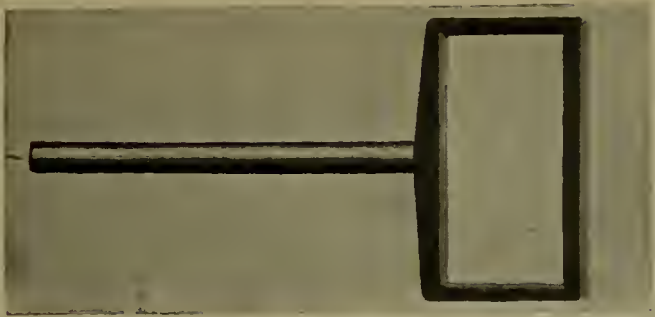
VALVE YOKE MADE WITH PNEUMATIC FORGING MACHINE.
